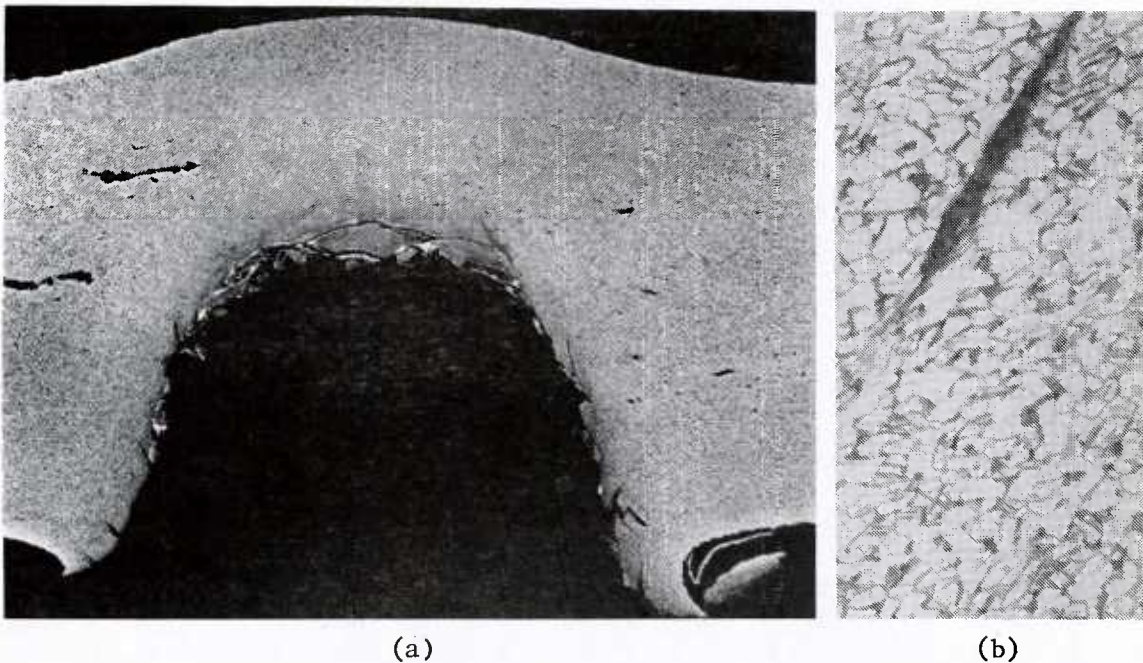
Shear Fractures and Associated Fractures Due to Bending Alone.
